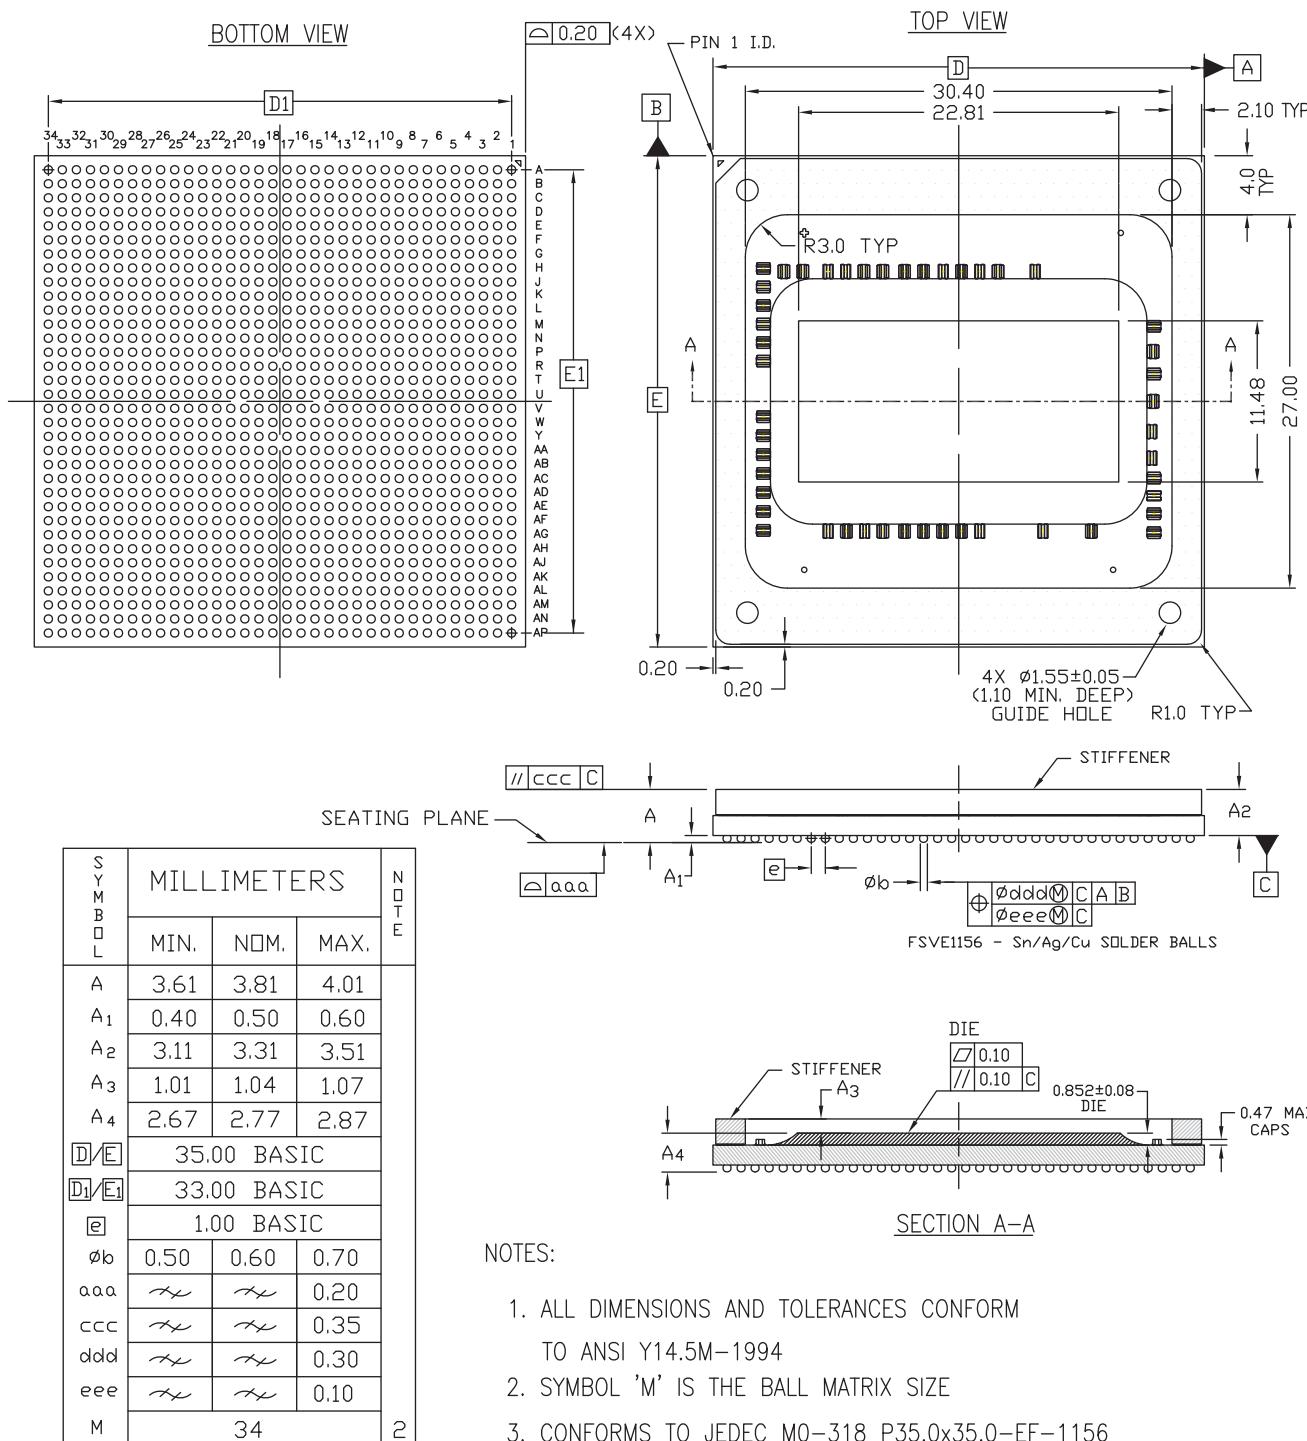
Package Dimensions for FSVE1156 (XCZU42DR, XCZU65DR, XCZU67DR)
